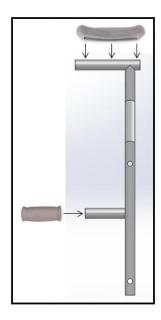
Illustration of how the crutch pad and hand grip were fitted to the support bar and handle
